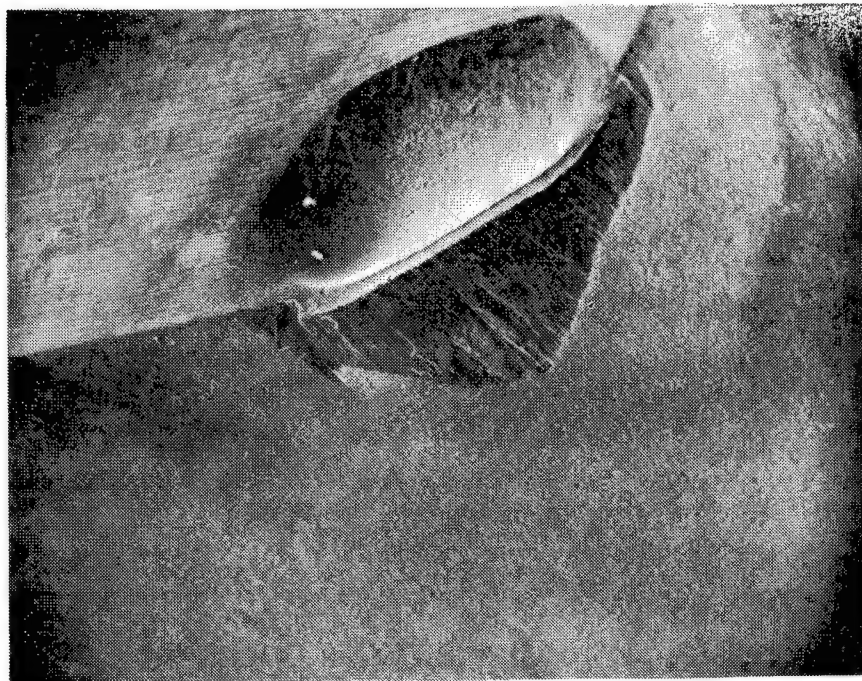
Photograph of a Typical Turning Test Tool for Fluid #33.
